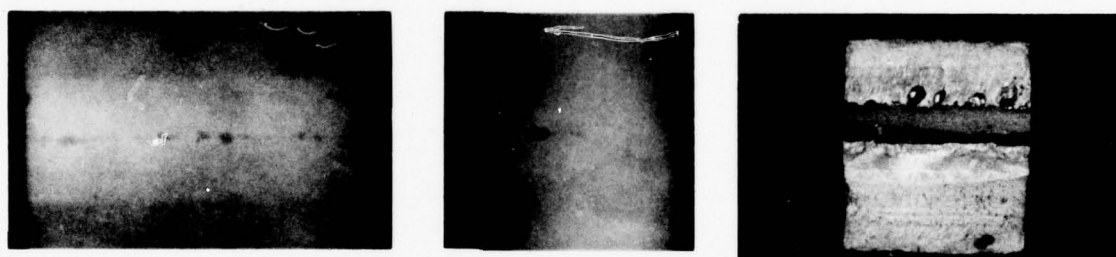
Test piece fracture surface with edge and normal incidence radiographs for typical small, medium and large LOP defects in 3/8-in. (9.6-mm) thick 5083/5183 Aluminum welds
